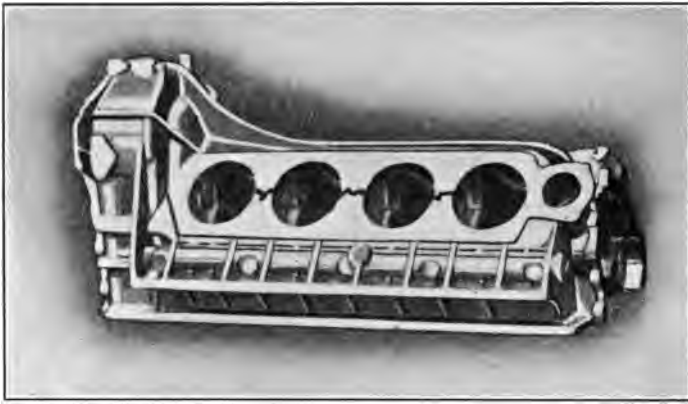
FRACTURED ALUMINIUM-ALLOY GEAR CASE.
